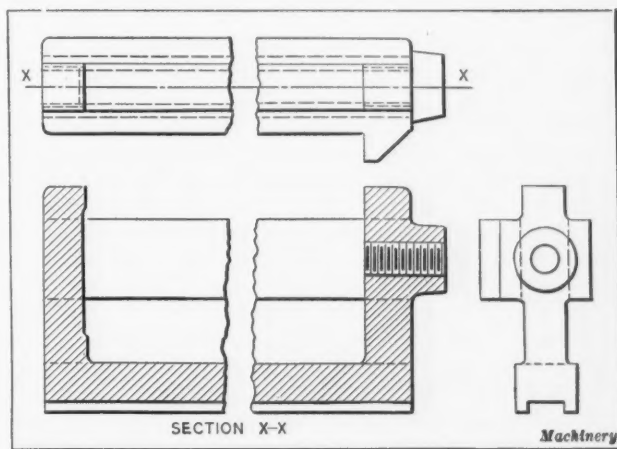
Sectional View of Work-holding Cage shown in Fig. 3
